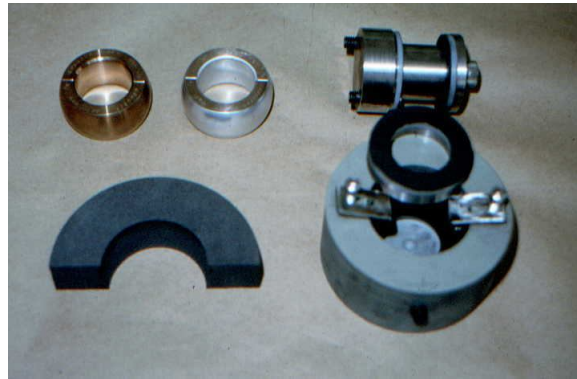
Holding and Masking Fixtures for Split Bearings.
